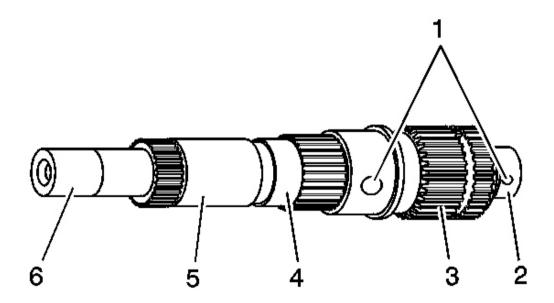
Front Support Bearing, Drive Gear Bushing, Front Sun Gear & Rear Support Bushing Courtesy of GENERAL MOTORS CORP.
